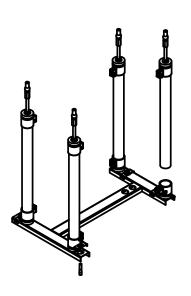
INSTALLATION ON A MOUNTING FRAME
